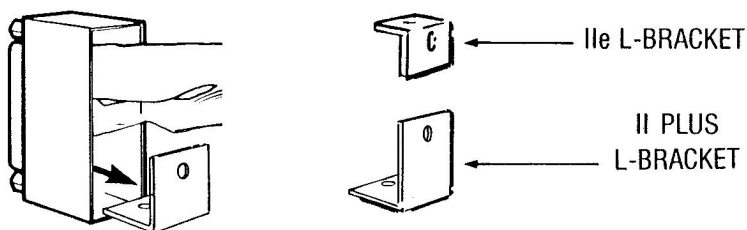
Install IIe L-bracket in top of cable clamp and II Plus L-bracket in bottom of clamp
